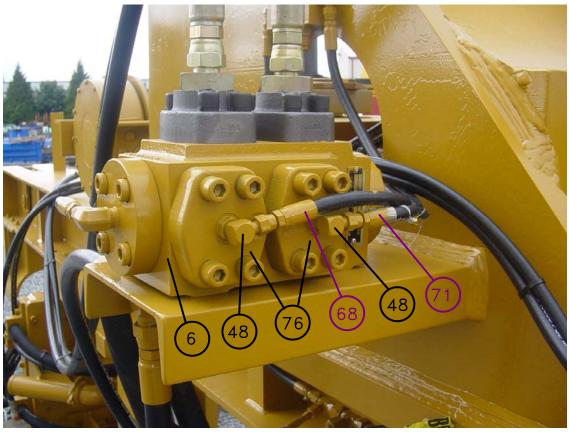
RIGHT-HAND SIDE SHOWING FEROY VALVE
